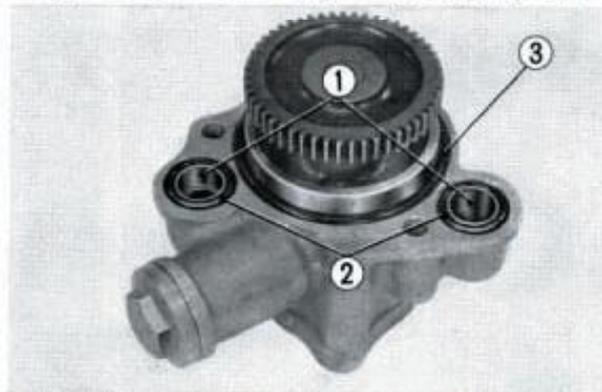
① O-ring collar ② 14 mm O-ring ③ 47 mm O-ring
